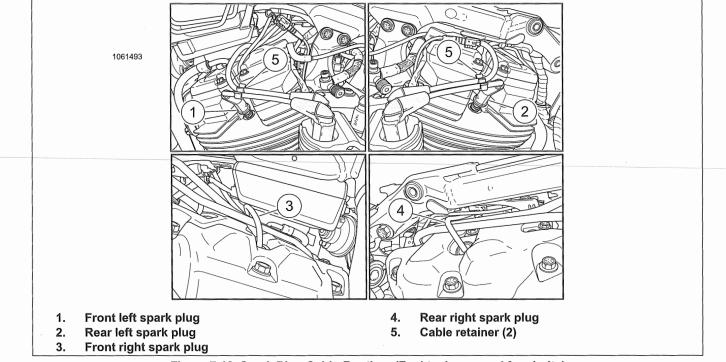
Spark Plug Cable Routing: (Fuel tank removed for clarity)
